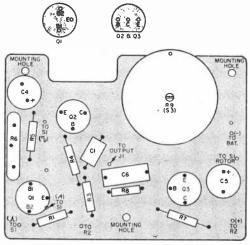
Transistors Q2 and Q3 have in-line leads, although the PC board shows a triangular arrangement, so that other transistor types may be used. Drawing is oversize to show parts layout clearly.
